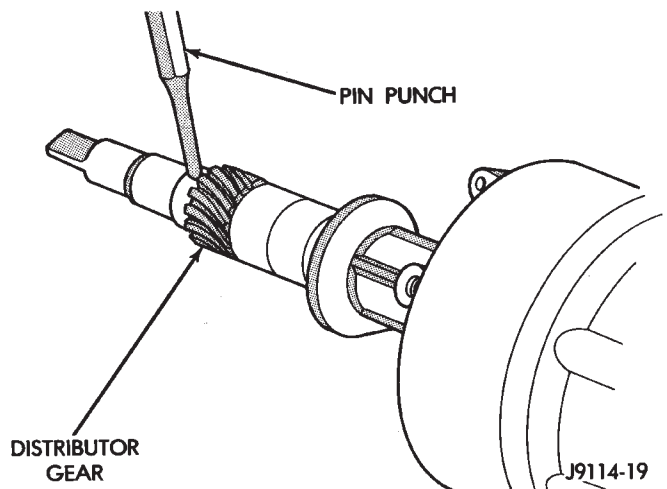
Distributor Gear—Removal/Installation—4.0L Engine
